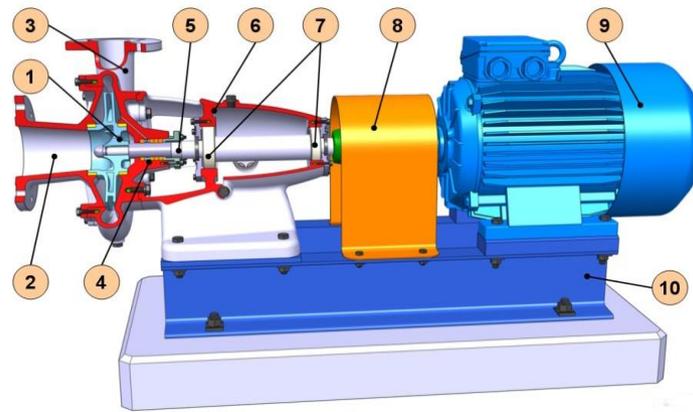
Side view of the cross section of centrifugal pumps: 1-the impeller, 2-suction apparatus, 3-the spiral conductive device, 4-sealing system, 5-drive shafts, 6-pump housing, 7-bearings, 8-elastic couplings, 9-electric motor, 10-pedestal pumps.
